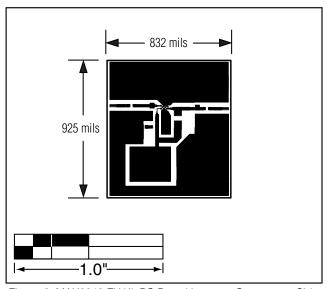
MAX2648 EV Kit PC Board Layout—Component Side
